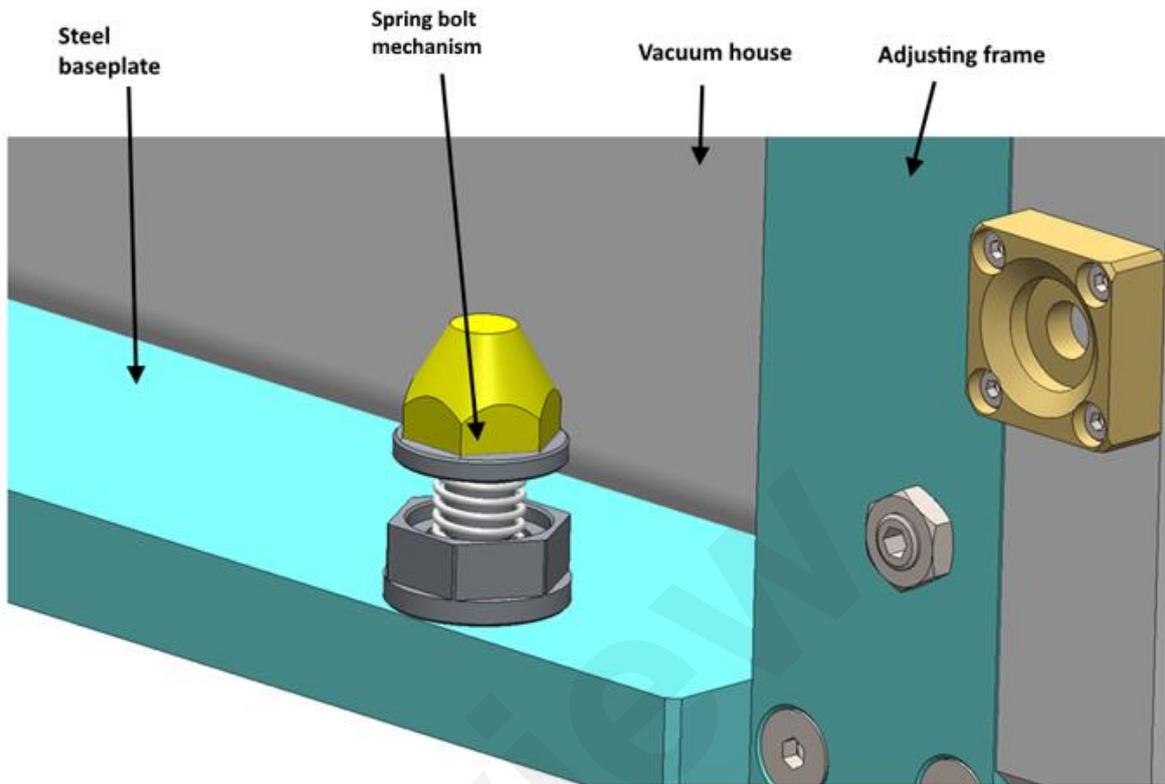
Vertical alignment of the vacuum housing with the spring bolt mechanism.
